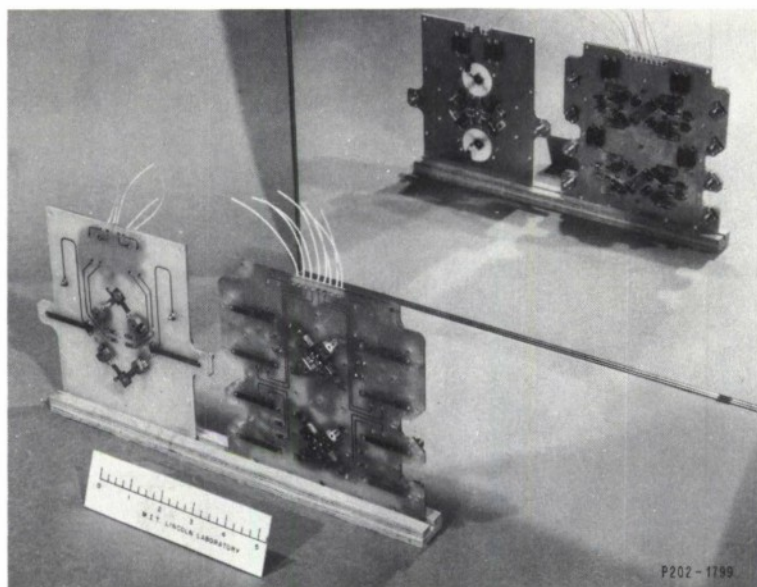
Circuit boards of 2P2T and SP4T sections with ground planes and components mounted and soldered in place.
